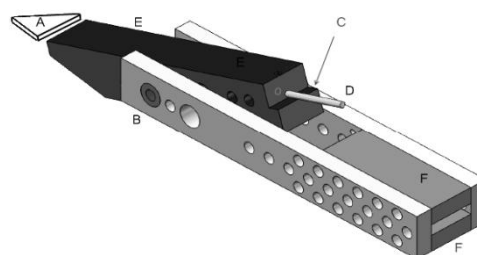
SCHEMATIC SHOWING THE MAIN PARTS OF THE TOOL HOLDER AND SHEAR PIN.
